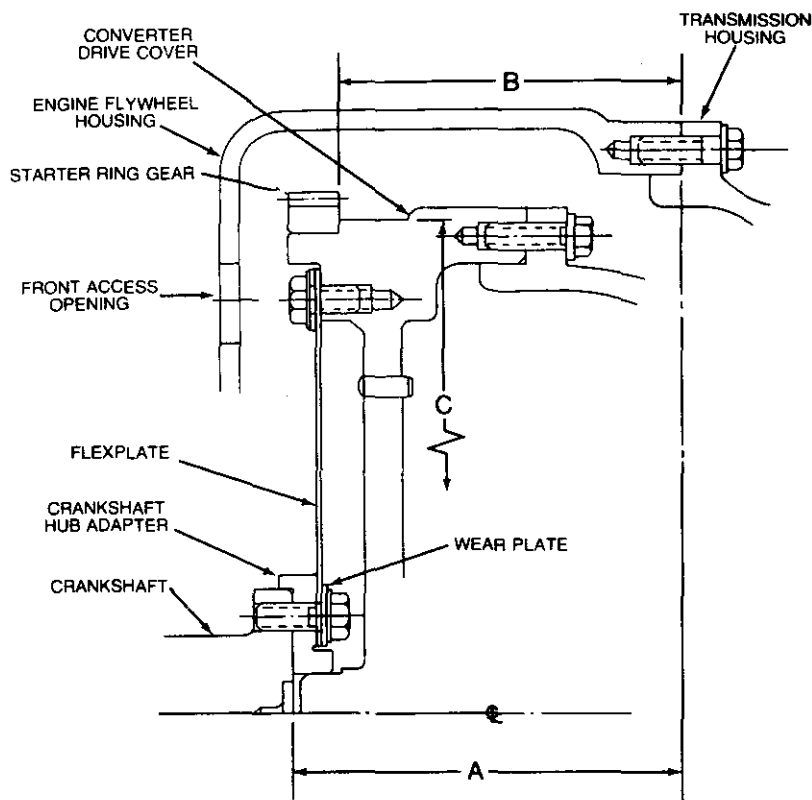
CRT 5633 crankshaft-piloted flexdrive
